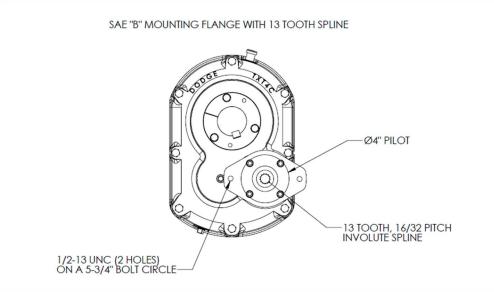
SAE "B" Mounting Flange -2 Bolt (1/2" bolts) with 13 tooth spline
